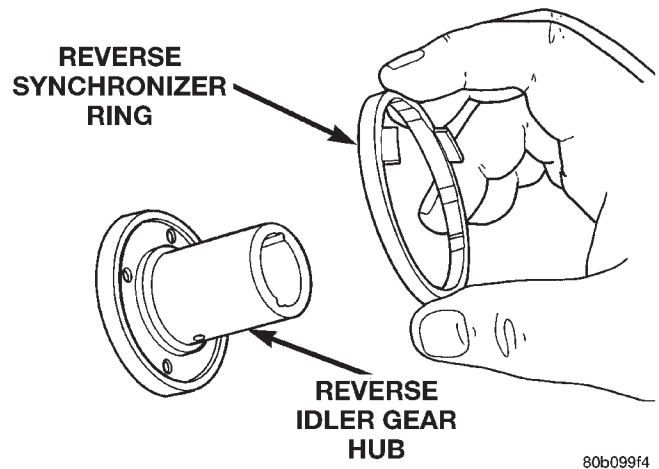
Remove Reverse Idler Gear Synchronizer Ring
